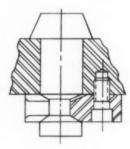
Modified C-washer type. Selfcleaning. Short means of attachment often used when crowded condition exists at rear of die.
